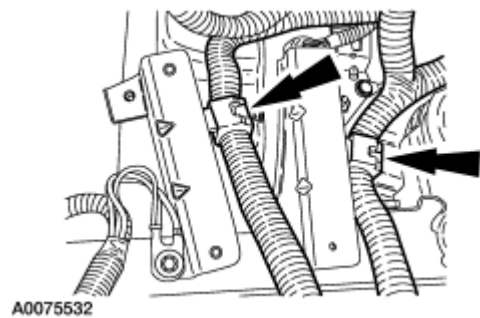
Locating Battery Tray Bracket & Wiring Harness
